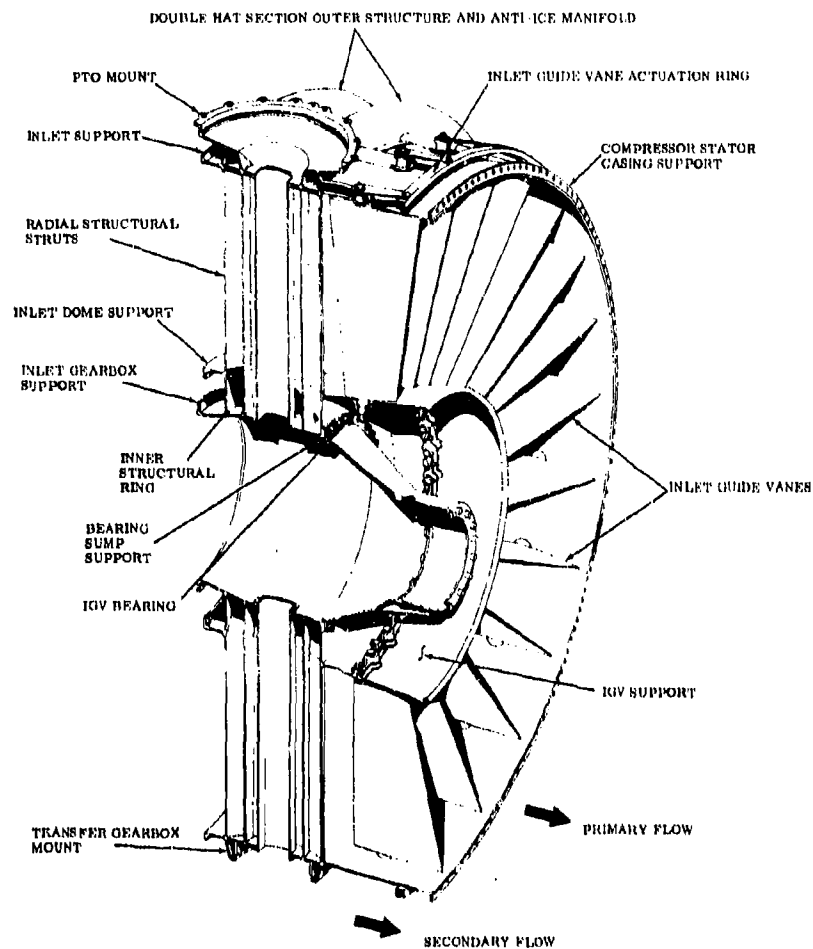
(L). COMPRESSOR FRONT FRAME ASSEMBLY
